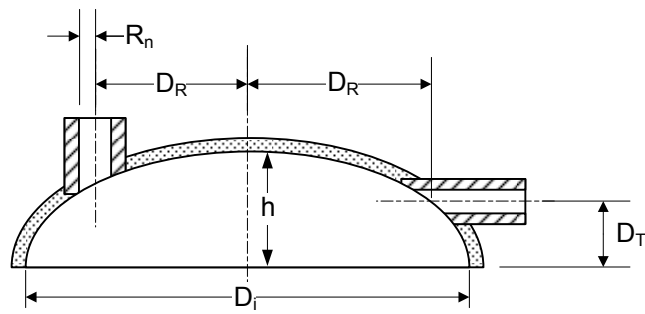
Hillside or Perpendicular Nozzle in a Formed Head
